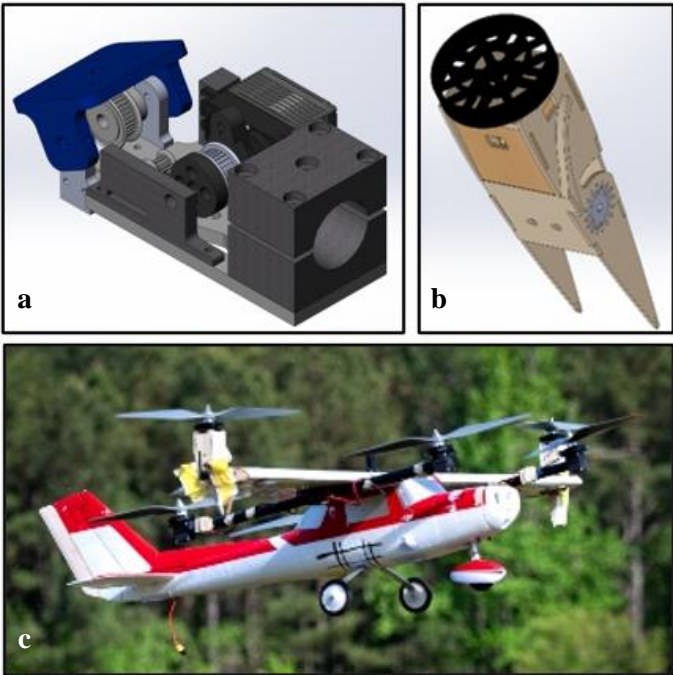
Development and flight testing of FINCH. (a) Front rotor tilt mechanism design, (b) tip tilt rotor nacelle design, (c) FINCH in flight.
